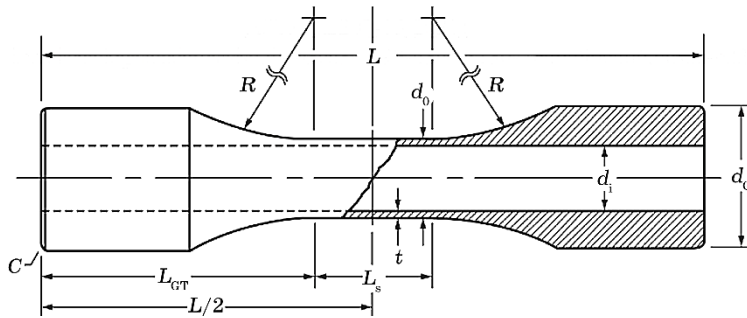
Thin-walled tubular specimen for combined testing under axial force and torsion.
